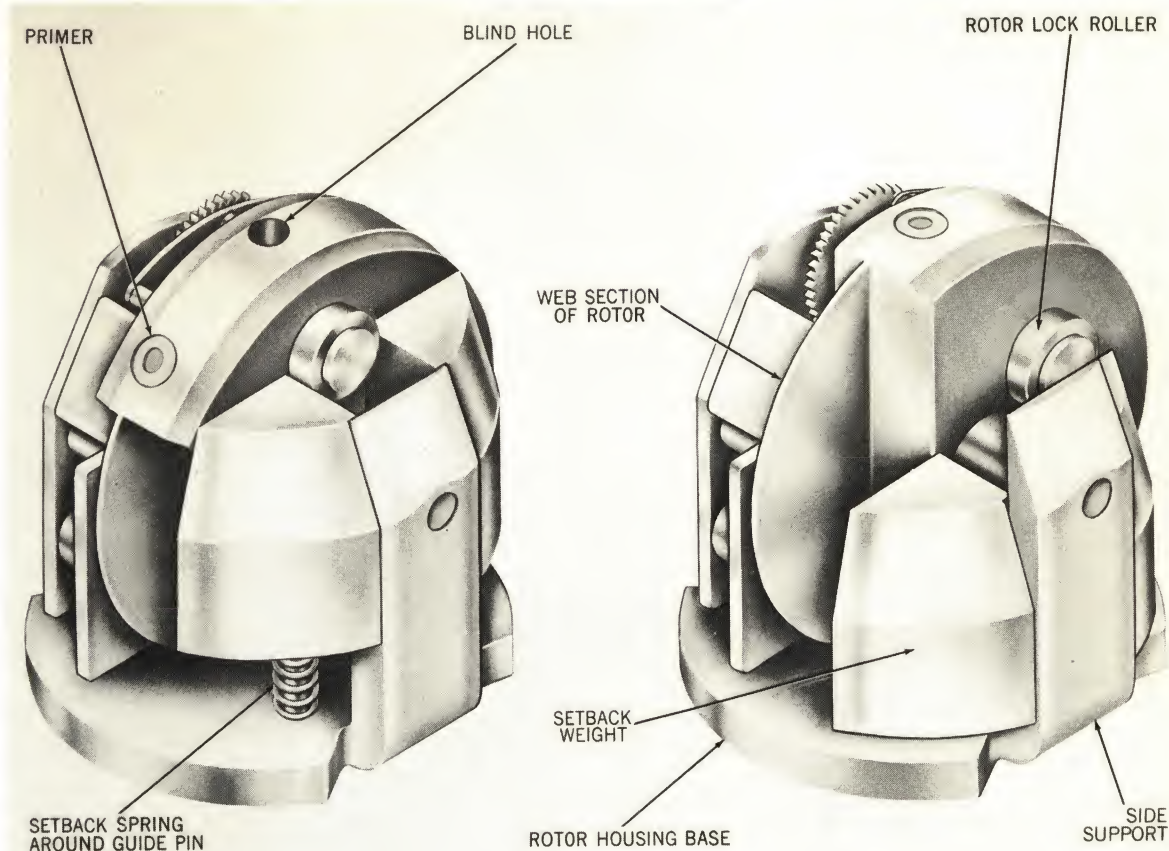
Rotor Arming Mechanism Removed from Fuze, Unarmed and Armed Positions, View from Right-hand Side.
